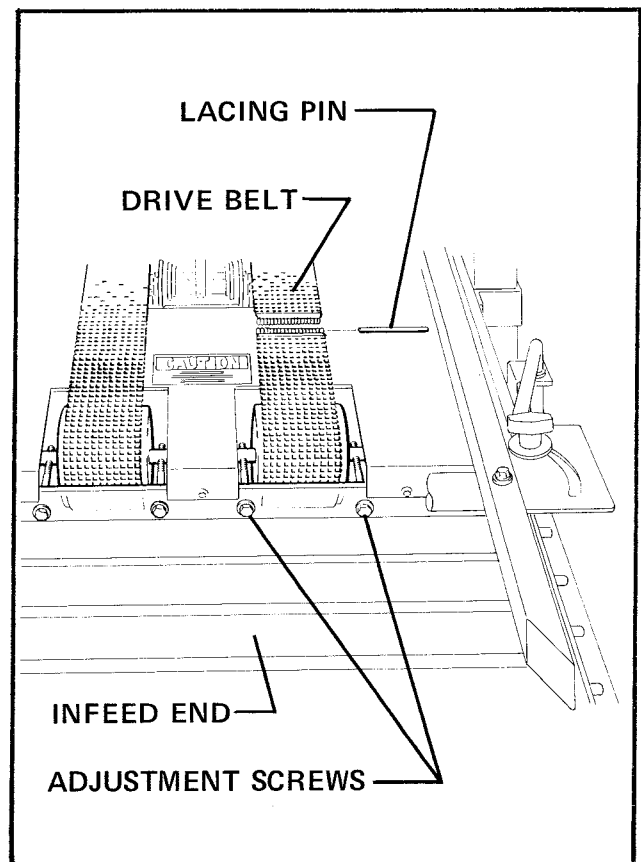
BOX DRIVE BELT REPLACEMENT.
